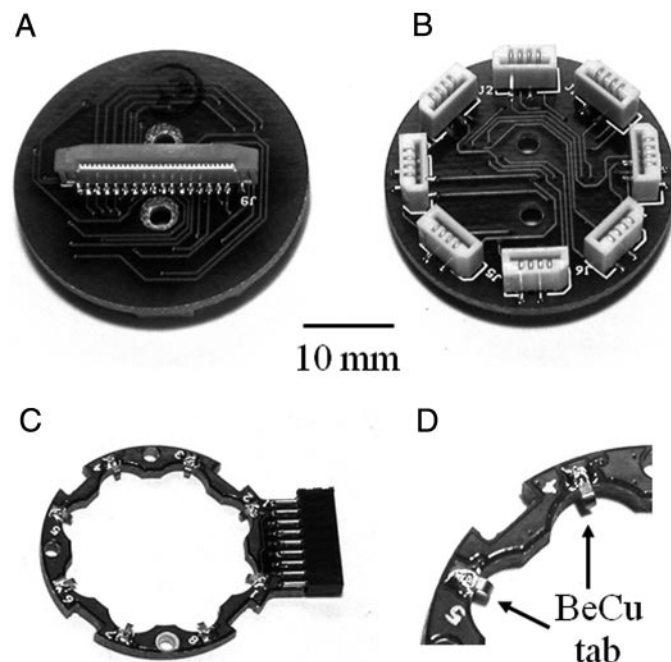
Photographs of the motor control printed circuit boards (PCB; *A*, top view; *B*, bottom view) and the signal PCB [*C*, top view; *D*, magnified to illustrate the beryllium-copper (BeCu) tabs].
